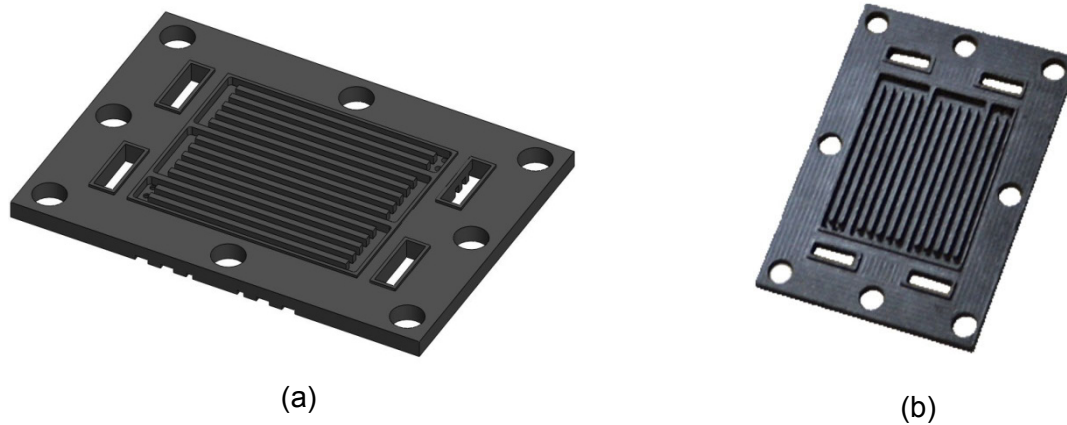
Designed and machined graphite bipolar plate (a) CAD solid model (b) photograph of machined bipolar plate.
